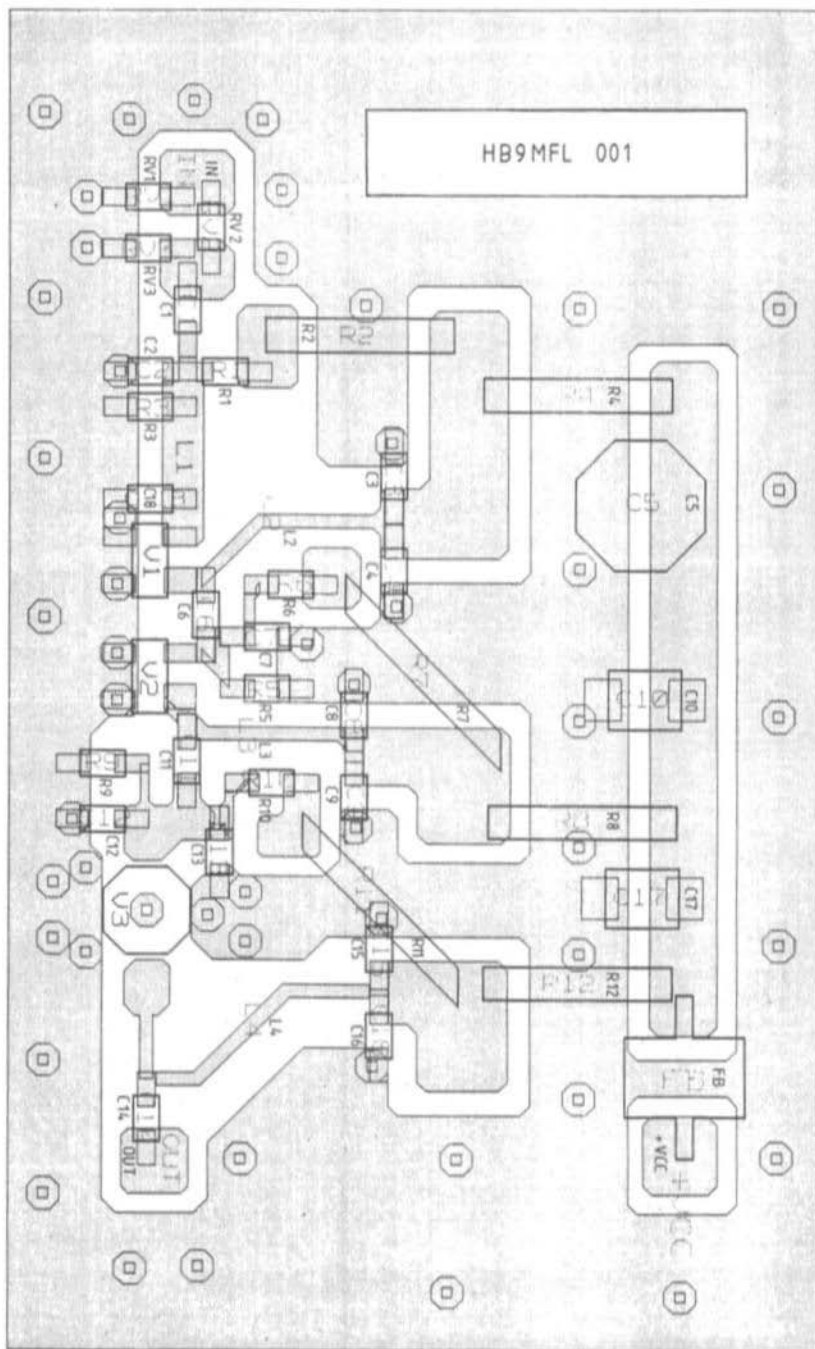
The enlarged printed circuit board HB 9 MFL 001
